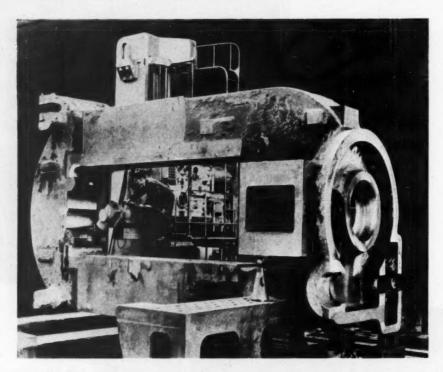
A floor type horizontal boring machine has been equipped with an underarm support and angular milling attachment to simplify machining of "window" in rolling mill housing.
